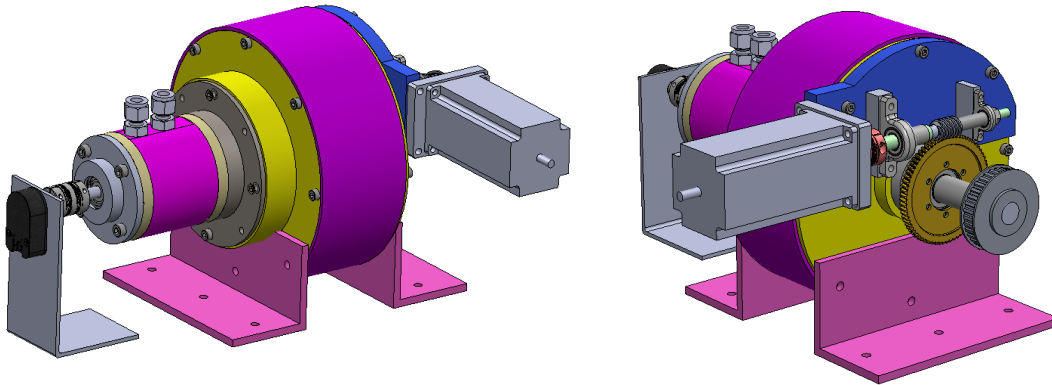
New HVVA rotary spool valve and phase shifter assembly
